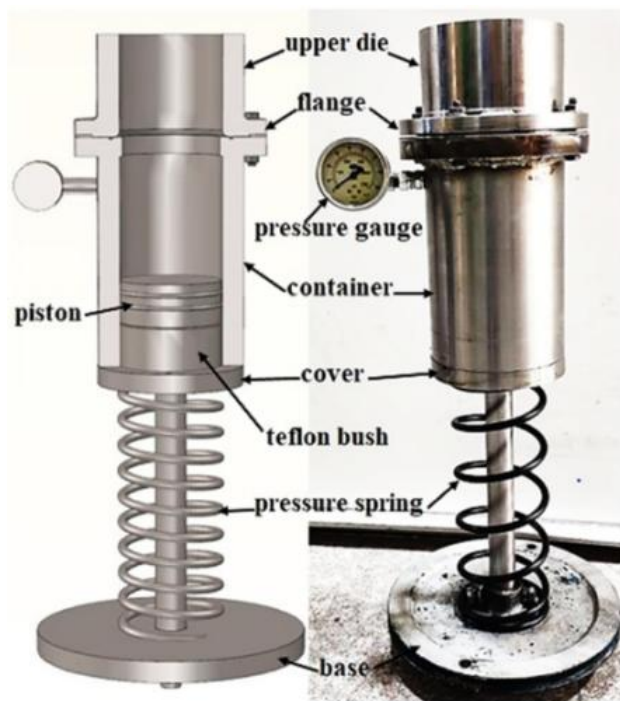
Mechanical hydraulic pump and die assembly used for the hydraulic bulge test.
